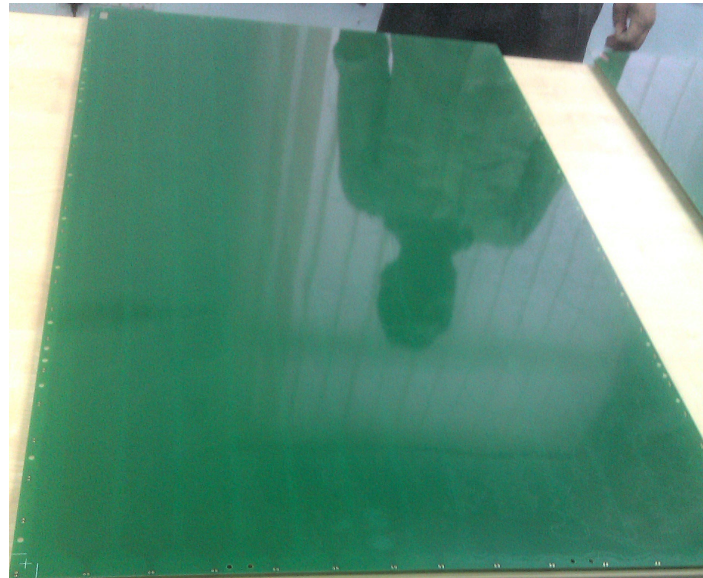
PCB pasted on the honeycomb boards with double-sided tape.
